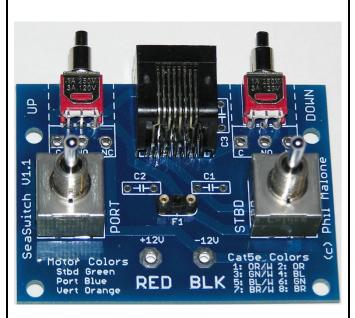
Components Mounted on the Printed Circuit Board
